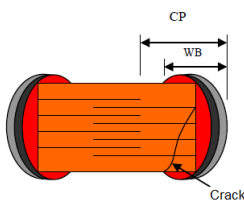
Open-mode design (CP>WB) circuit open during cracking.
